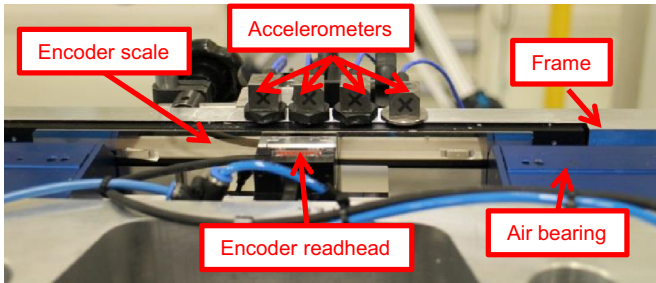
Setup of four IEPE accelerometers mounted to the machine frame.
